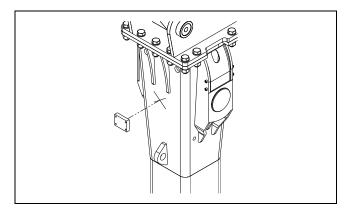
Weld Mounting Plate To Housing
